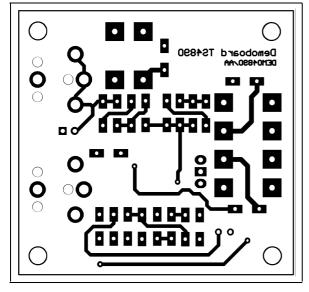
SO8 & MiniSO8 Demoboard Bottom Solder Layer
